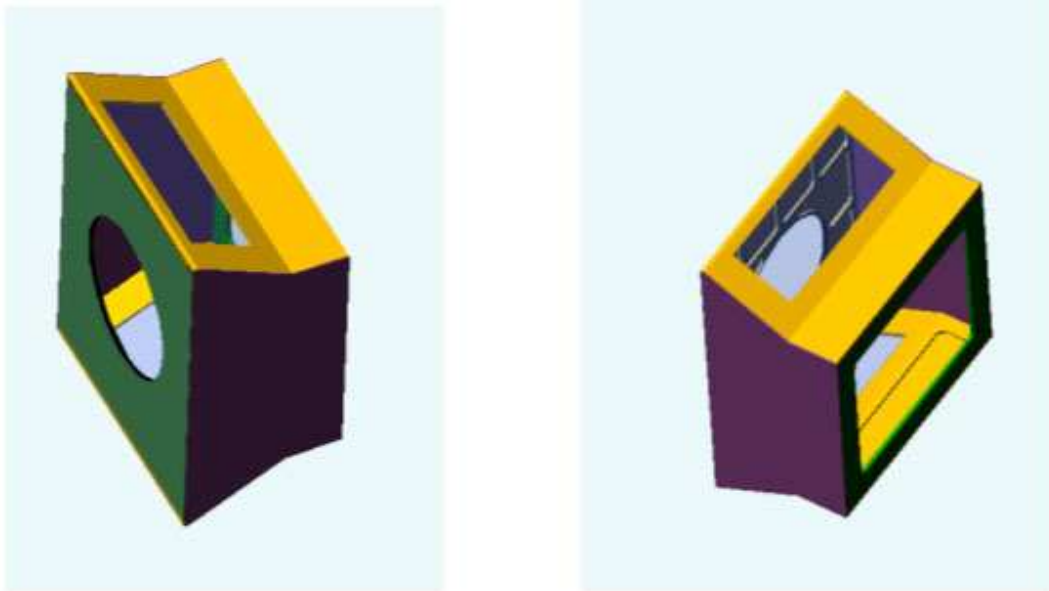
The gas enclosure, a monocoque construction manufactured from welded panels of 30 mm-thick aluminium tooling plate.
